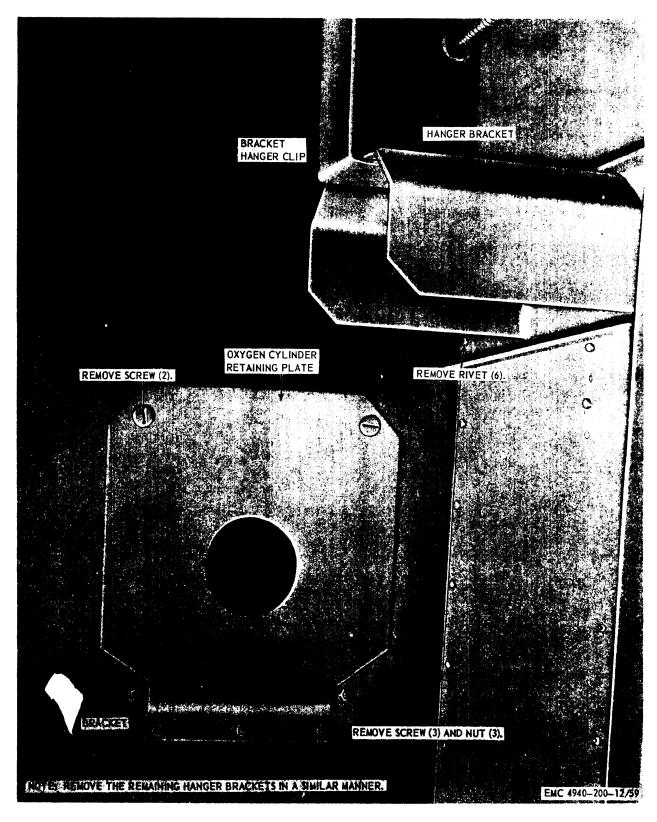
Oxygen cylinder retaining plate and bracket, hanger clip, and hanger bracket, removal and installation.
